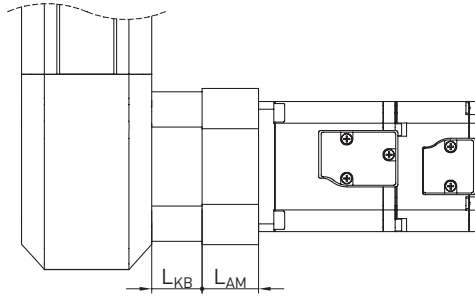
Motor connection of linear module HM-B without gearbox
